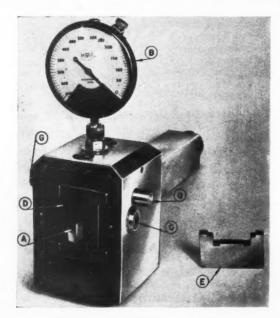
Illustration showing machinability tester for workshop use. By standardizing several variables it is possible to simplify the making of tests. The machinability index of a material is given as a number on the dial.
